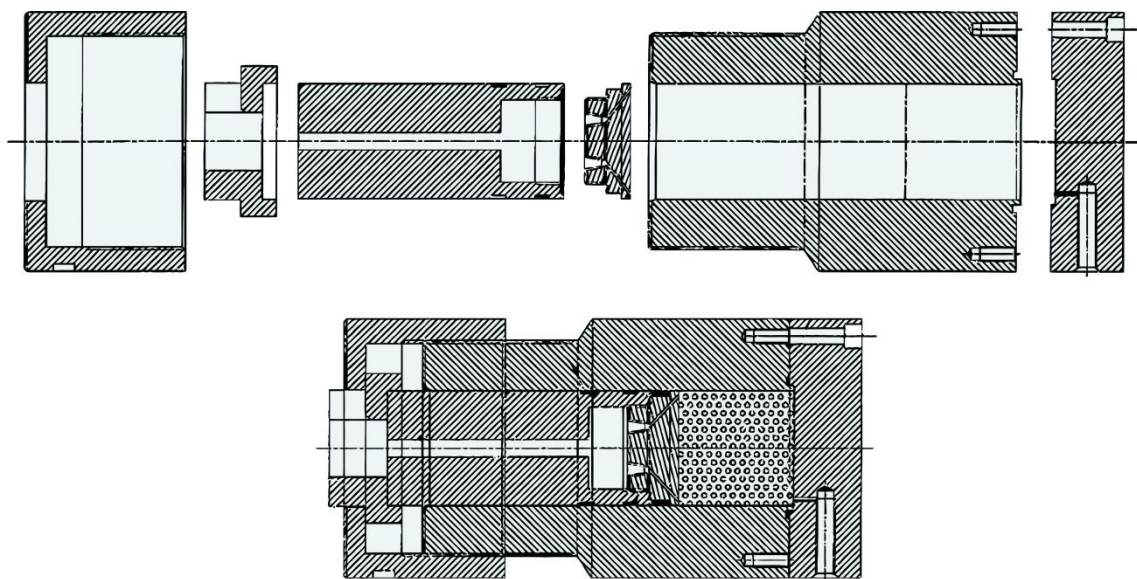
Construction design of the diffusion cells: General assembly drawing and exploded view, after /INF 11/
